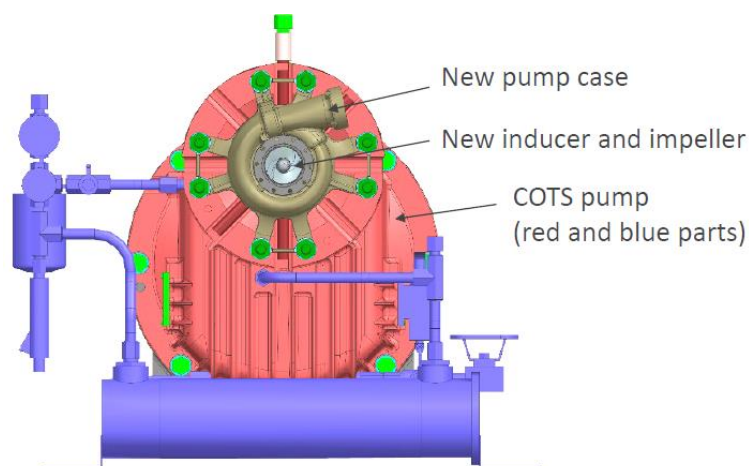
Turbo-pump demonstrator showing COTS and parts designed and manufactured by GKN
